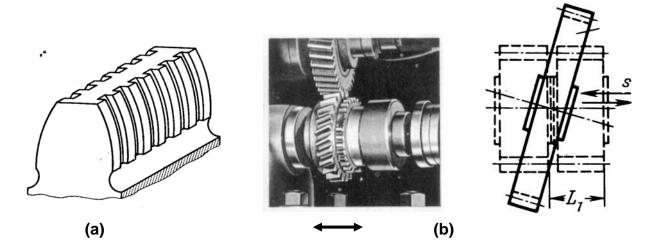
Cutting teeth of gear shaving (a) cutter and its (b) action
